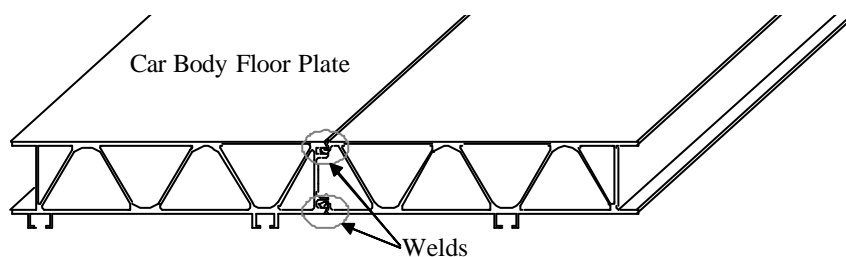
Welded aluminium extrusions with longitudinal weld in a car body floor structure.
